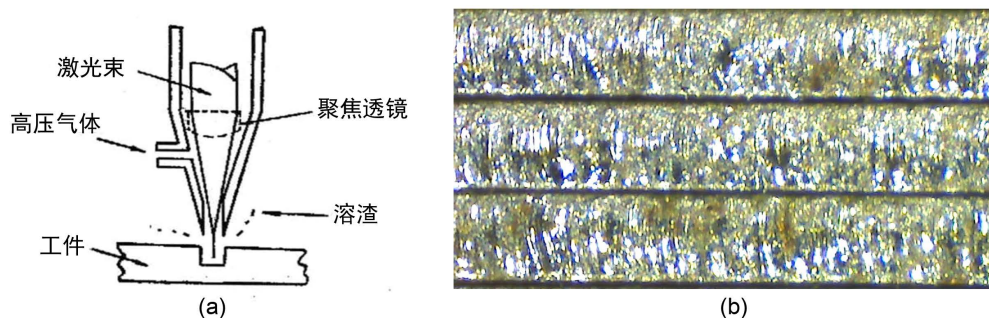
Principle of laser cutting and sectional drawing of steel plate (B23P085)
